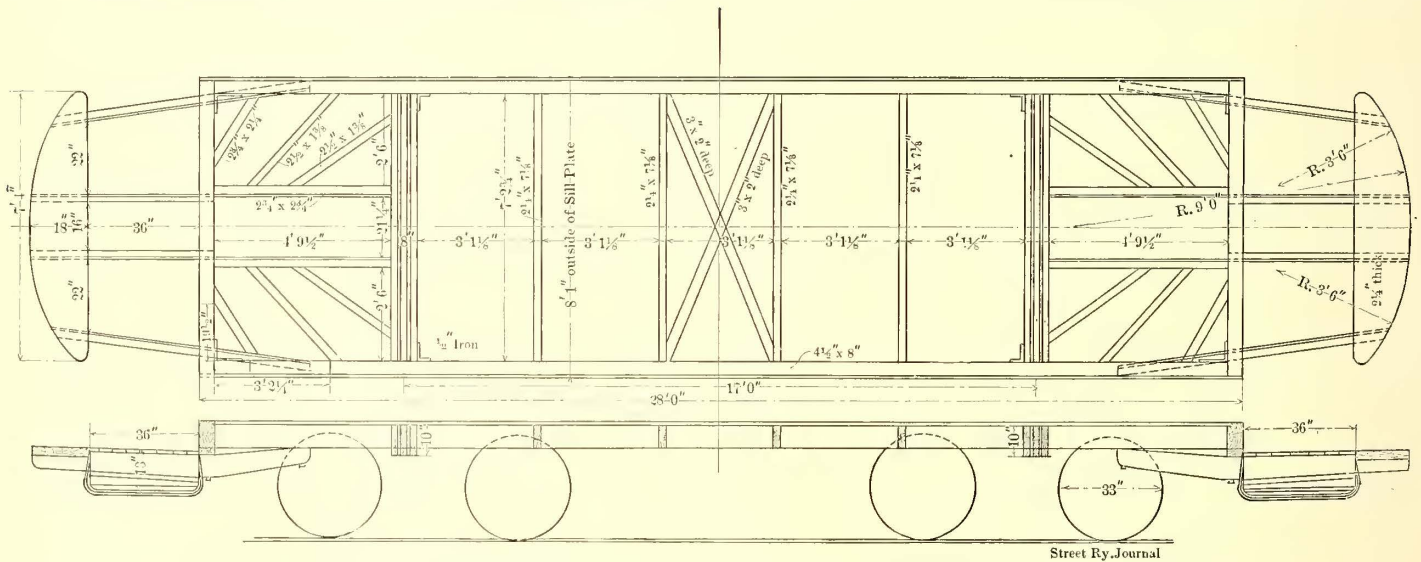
PLAN OF FLOOR FRAMING OF 28-FT. CAR, STANDARD CONSTRUCTION FOUR YEARS AGO
